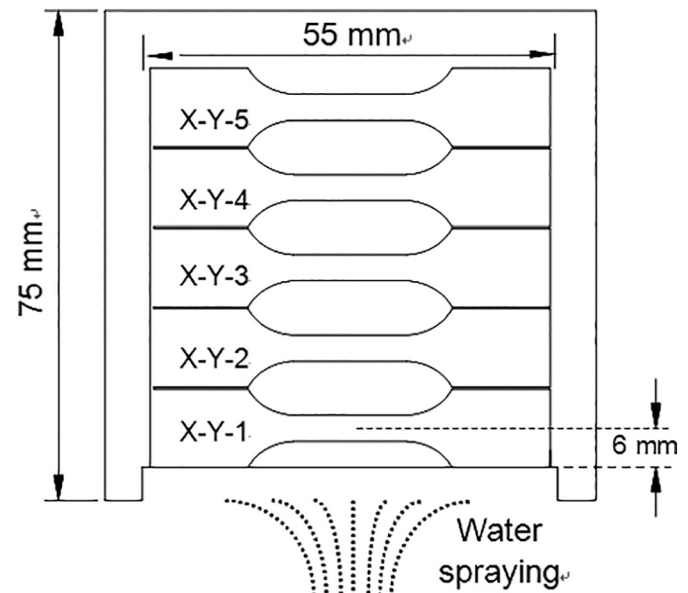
Tensile specimens cut from the sheets with T8-aging following end quenching.
